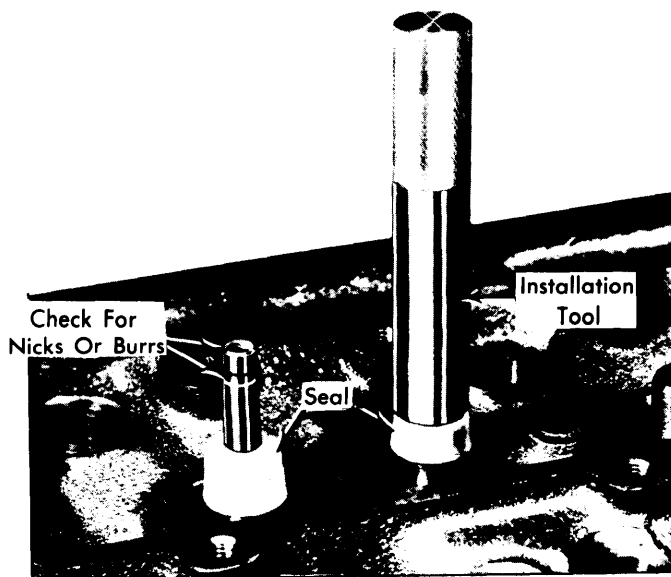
Correct Procedure to Install Valve Stem Oil Seals
